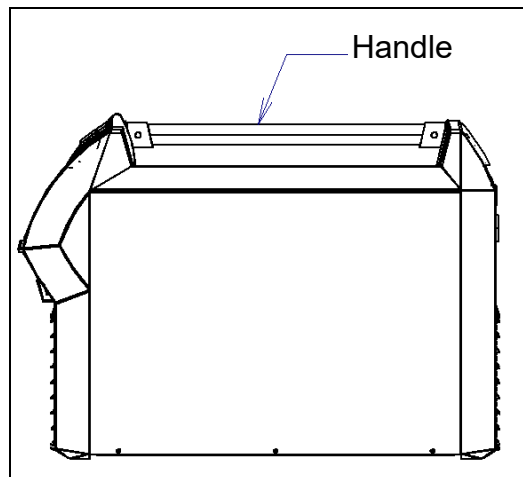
(c) Transportation of welding power supply
